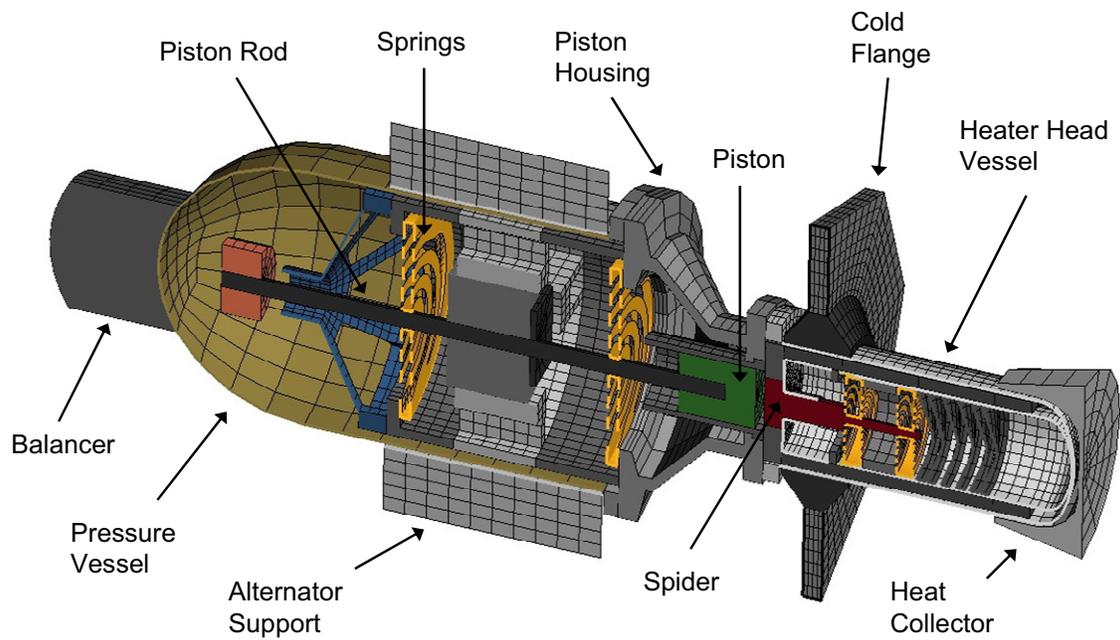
Stirling Converter Assembly Model with Internals – Cut Away View
